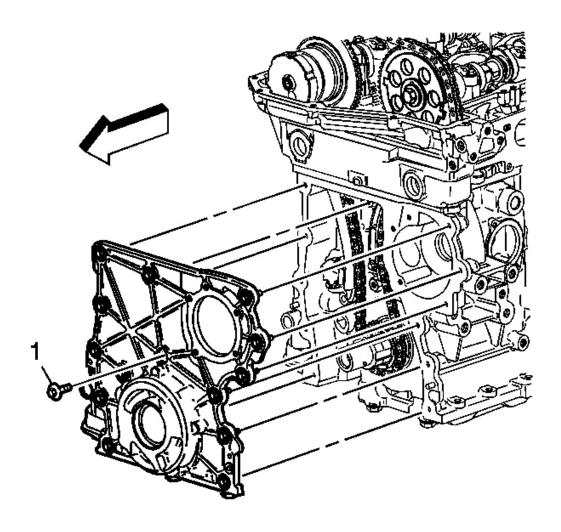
View Of 7 mm Center Bolt Courtesy of GENERAL MOTORS CORP.
